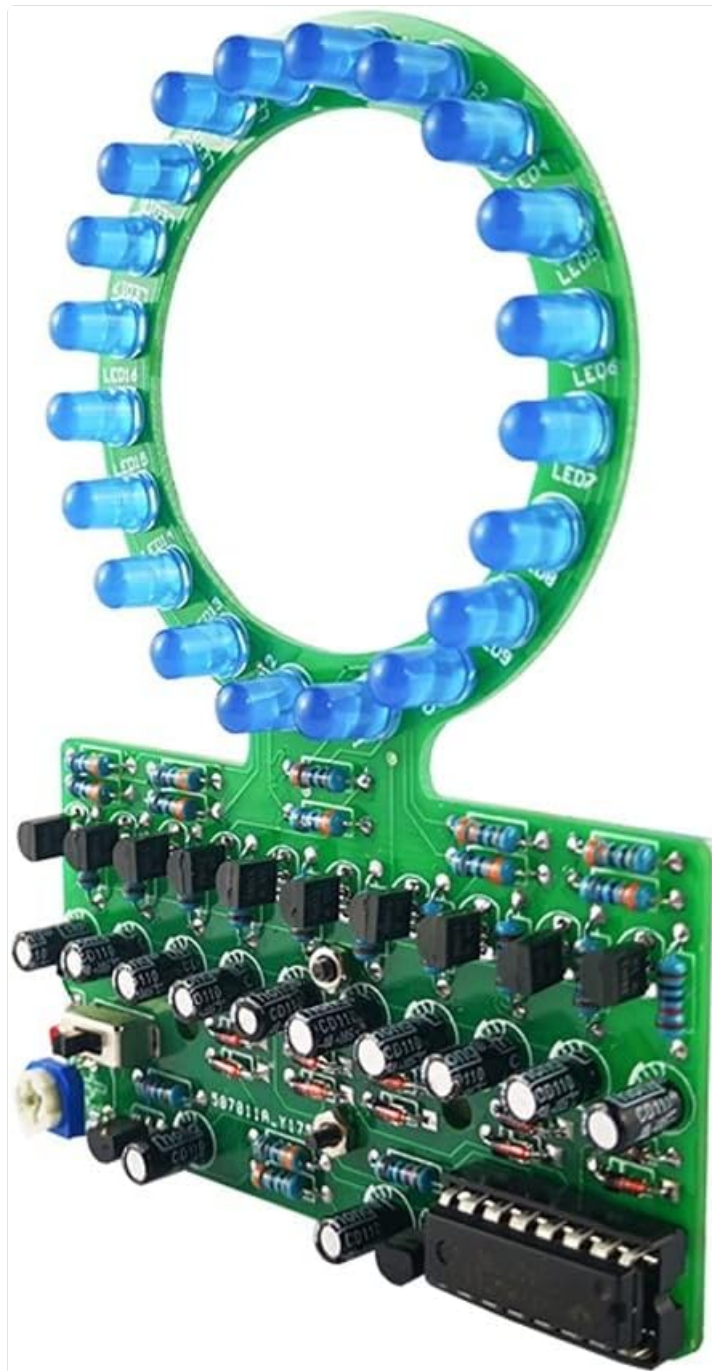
An angled perspective of the assembled kit, providing a clearer view of the component placement on the PCB and the LED ring structure.
